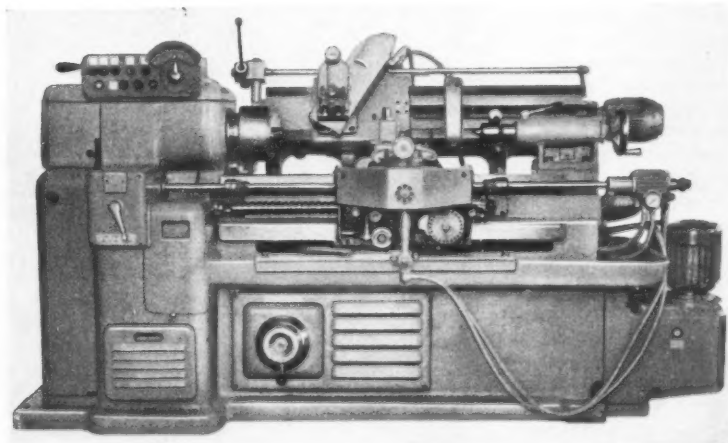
Mannaioni Man-au-cycle high-speed threading lathe equipped for taper threading and copy turning
